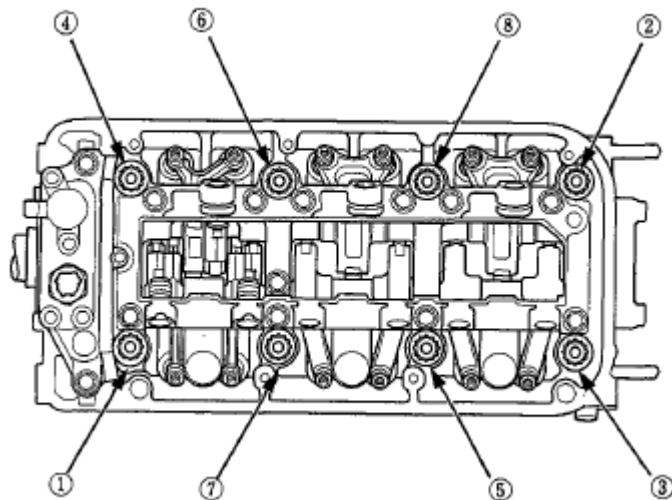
Identifying Front Cylinder Head Cover Bolt Tightening Sequence
